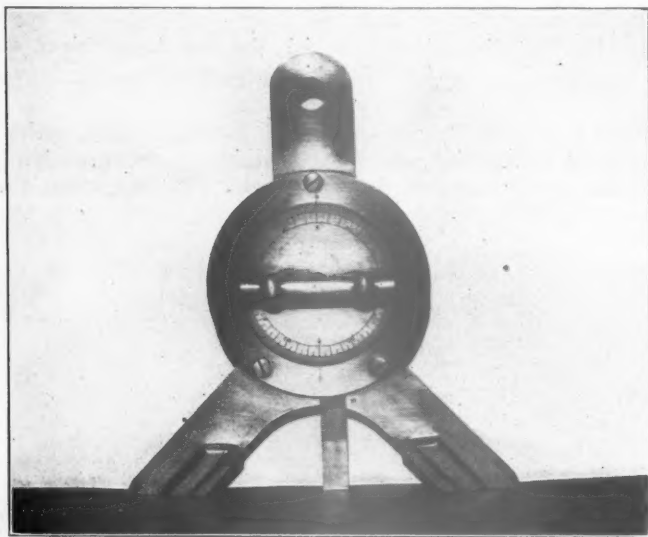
Gage used for locating eccentric keyways on new axles for Stevenson valve gear
